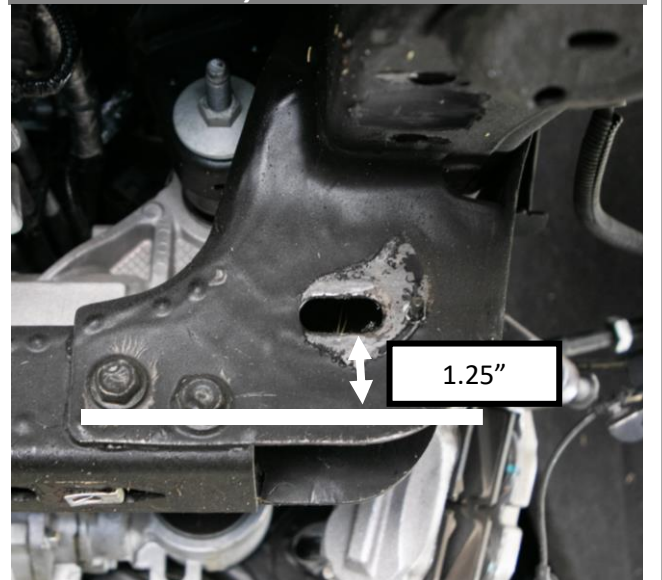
Driver's Side Front Crossmember, Only Trim Front Face
